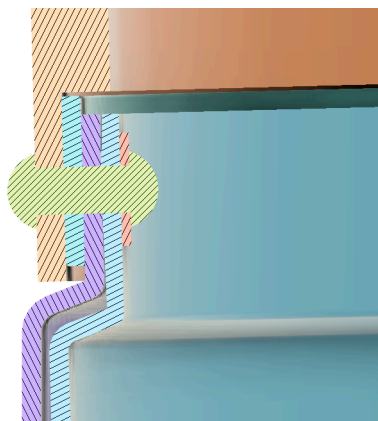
Joining between top casing and stainless-steel casing with rubber seals and gasket in-between. The handle subsystem is mounted at the top and bottom on to the top casing and base respectively. To account for manufacturing and assembly differences between each kettle, the
